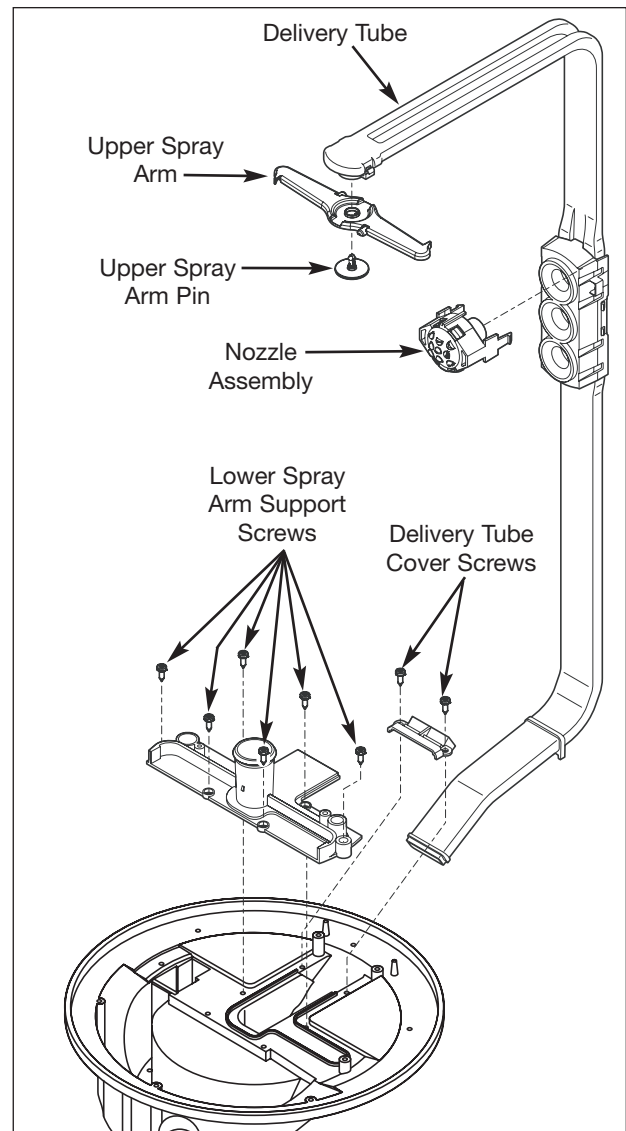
Delivery Tube and Lower Spray Arm Support Removal
